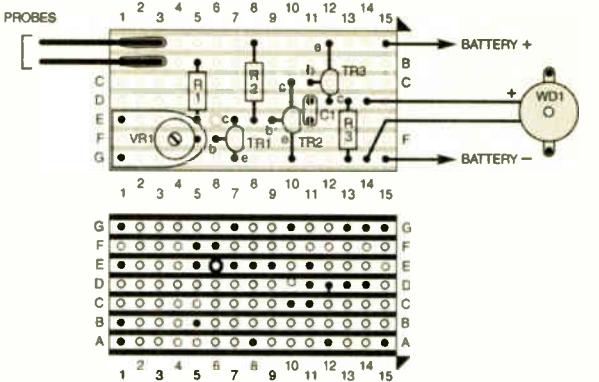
Plant Watering Reminder component layout; only one copper track break is needed.
